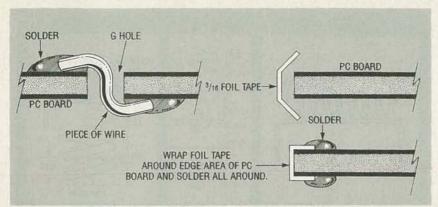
ALL HOLES MARKED "G" in Fig. 4 must have jumper wires passed through them that are soldered on both sides of the PC board as shown here. Also, both sides of the board must be grounded together with copper-foil tape as shown.
